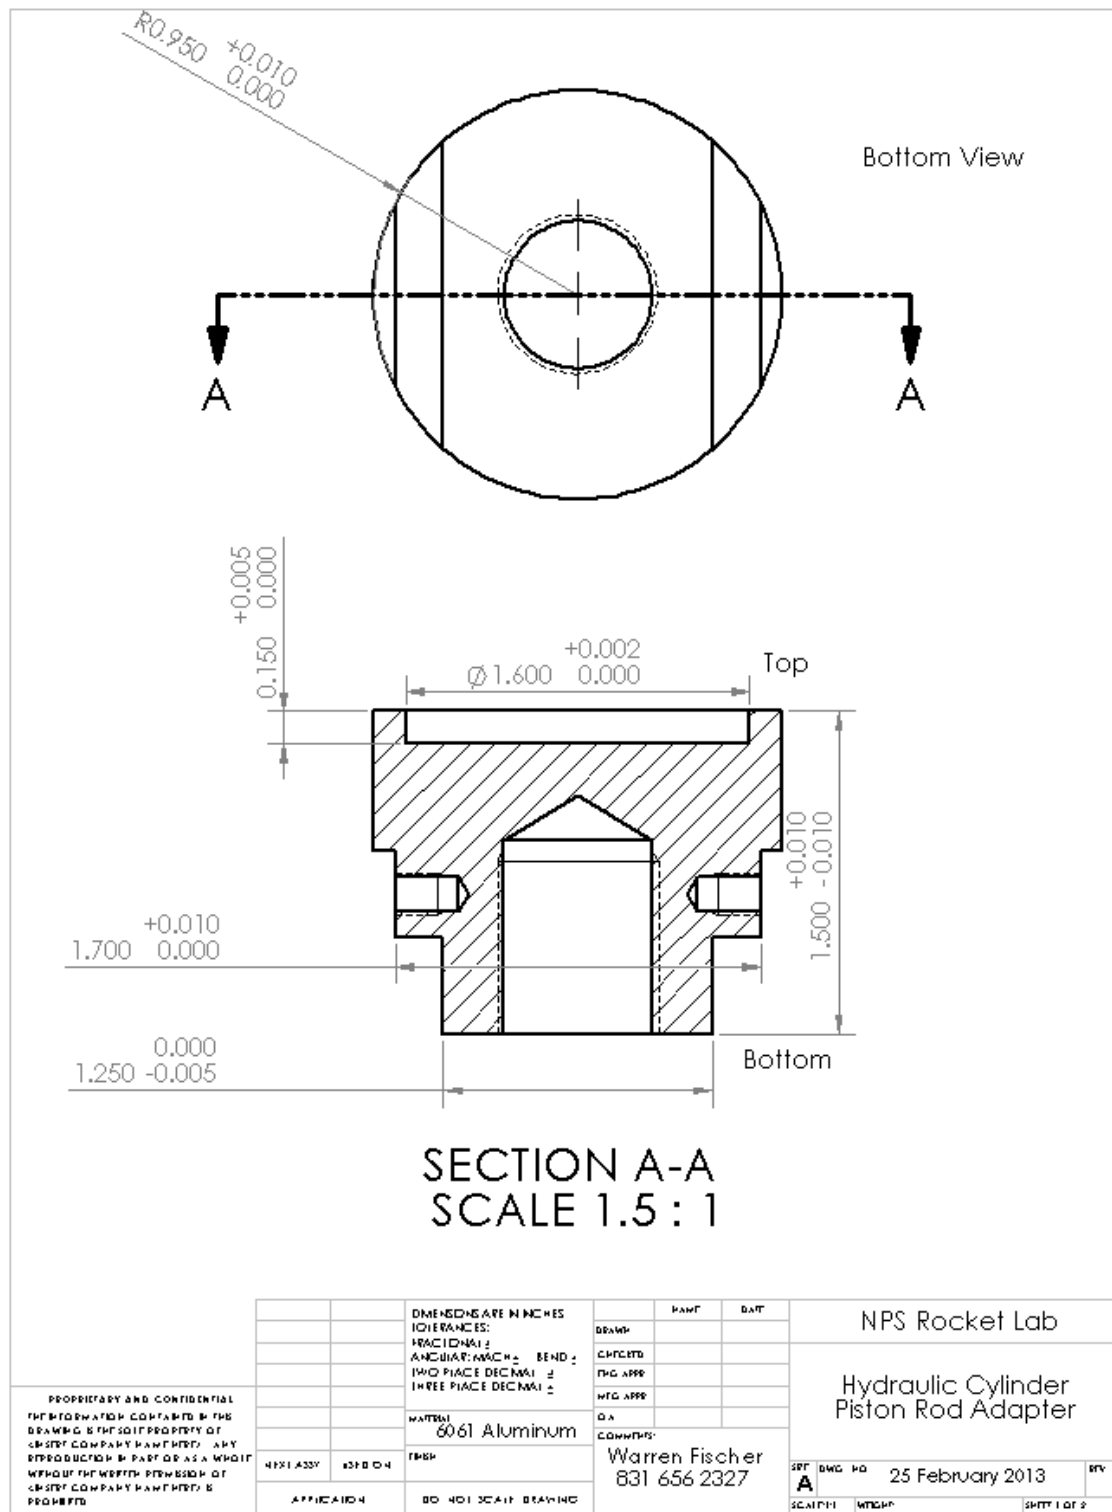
Fabrication Drawing for EMD Injector Adapter between Hydraulic Cylinder Output Rod and Injector Plunger (View 1 of 2)
